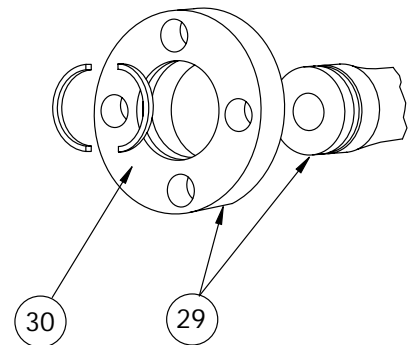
SLIP ON FLANGE ASSEMBLY
